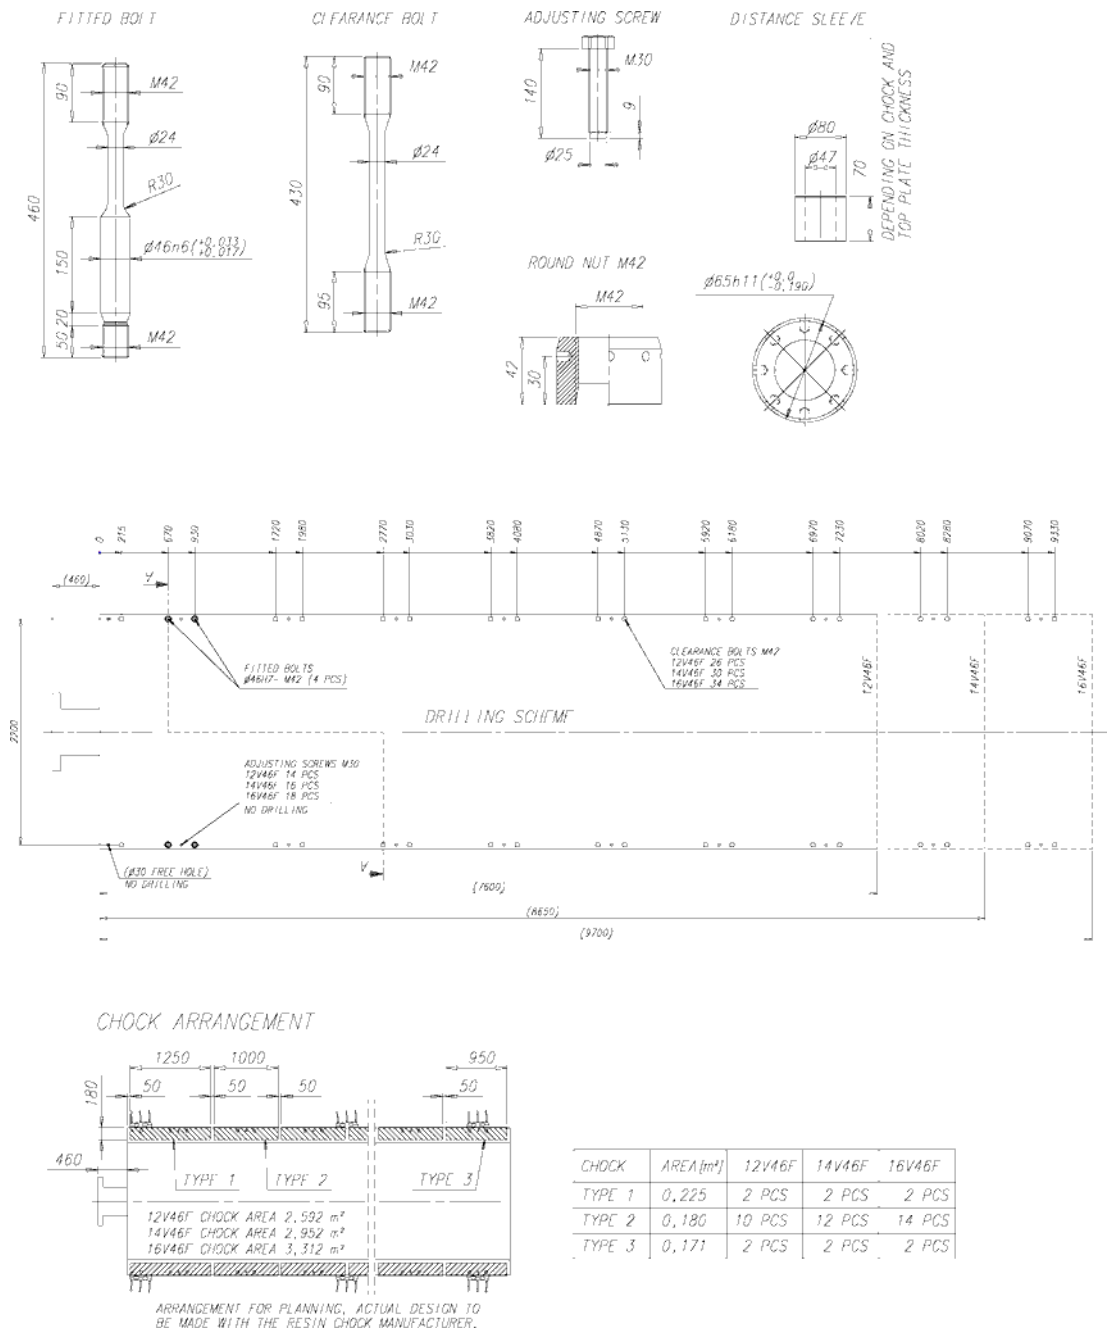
Seating and fastening, rigidly mounted V-engine on resin chocks (DAAE074226A)
